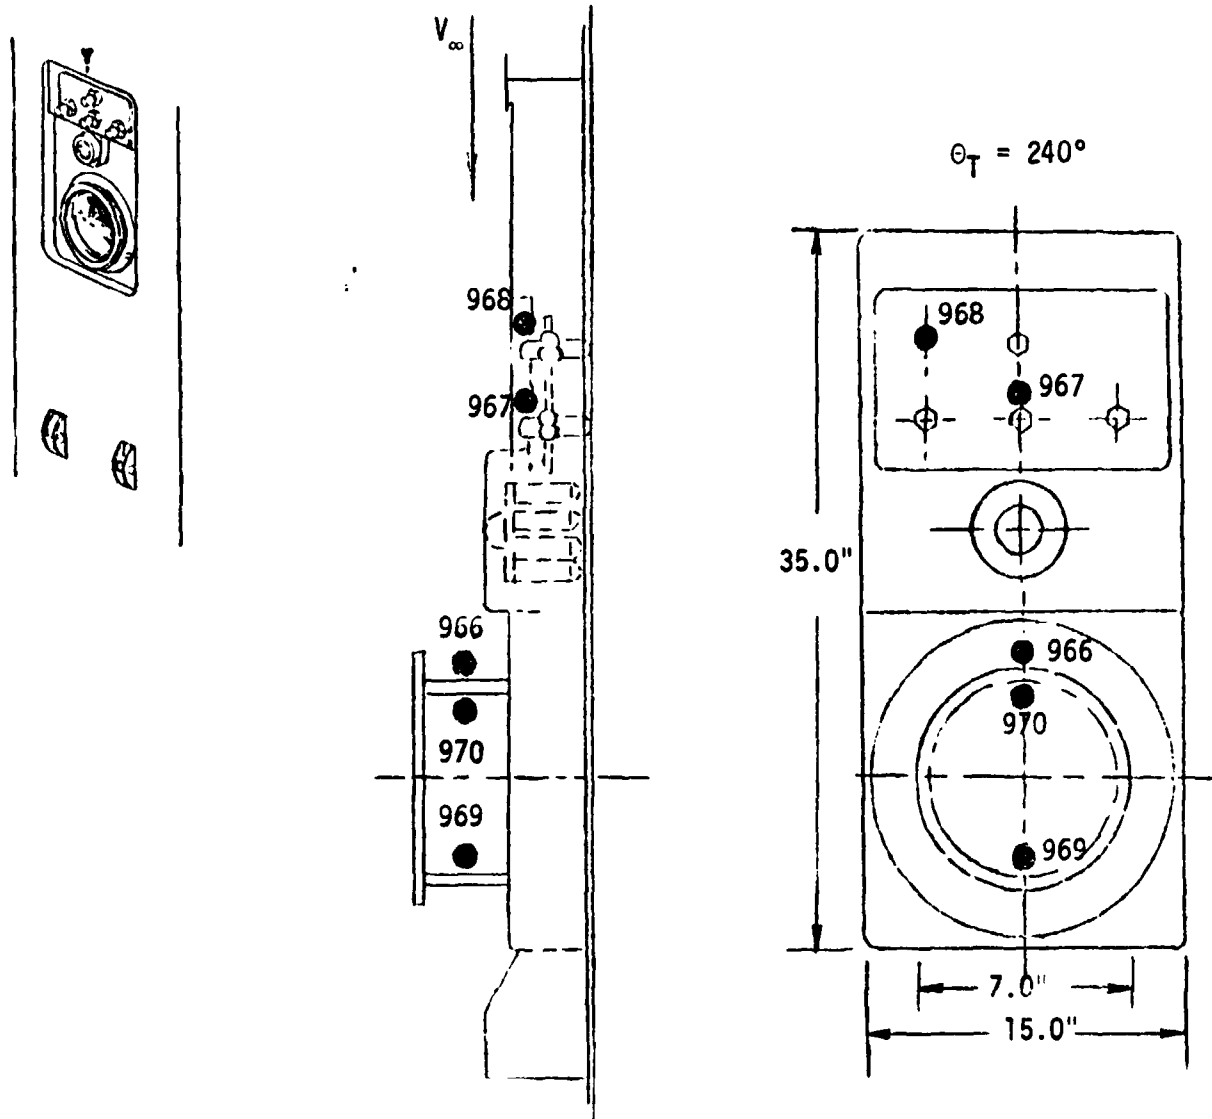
Forward ET/SRB Attachment Structure Design Body Point Definition
